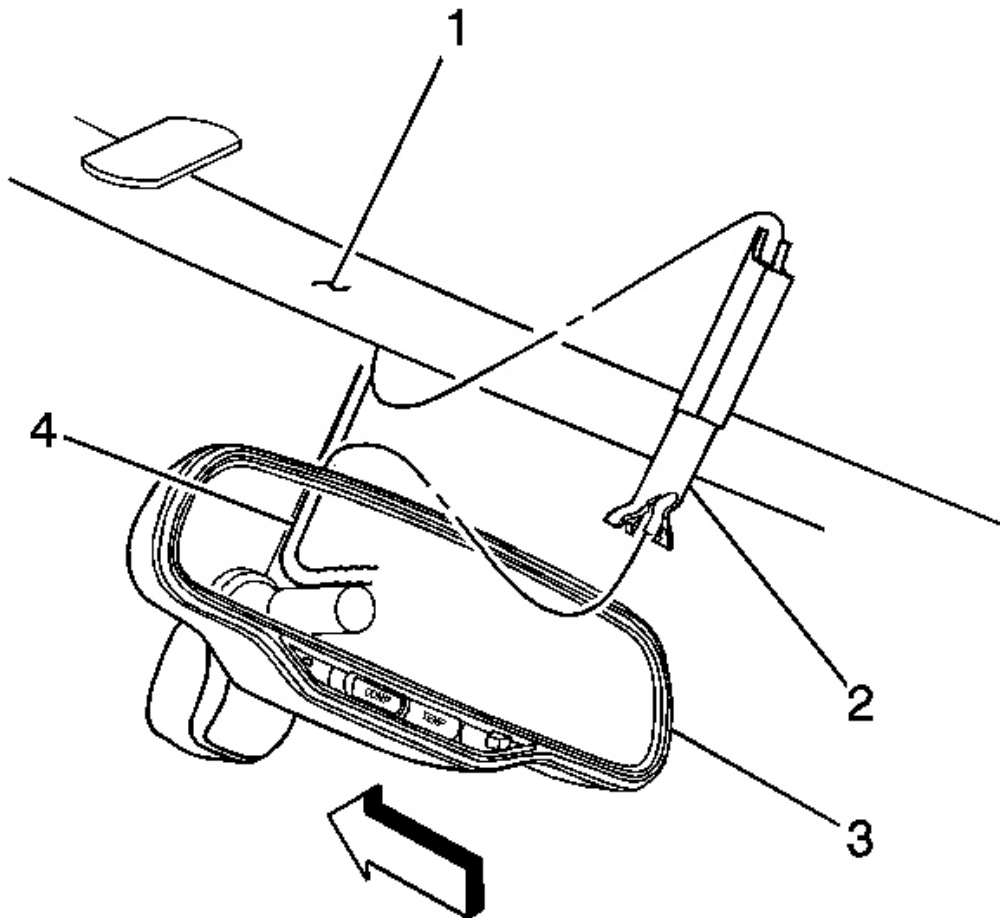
Identifying Electrical Connector & Rearview Mirror
